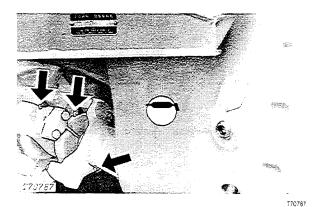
Axle Drive Shaft Universal Joints (3 points)
